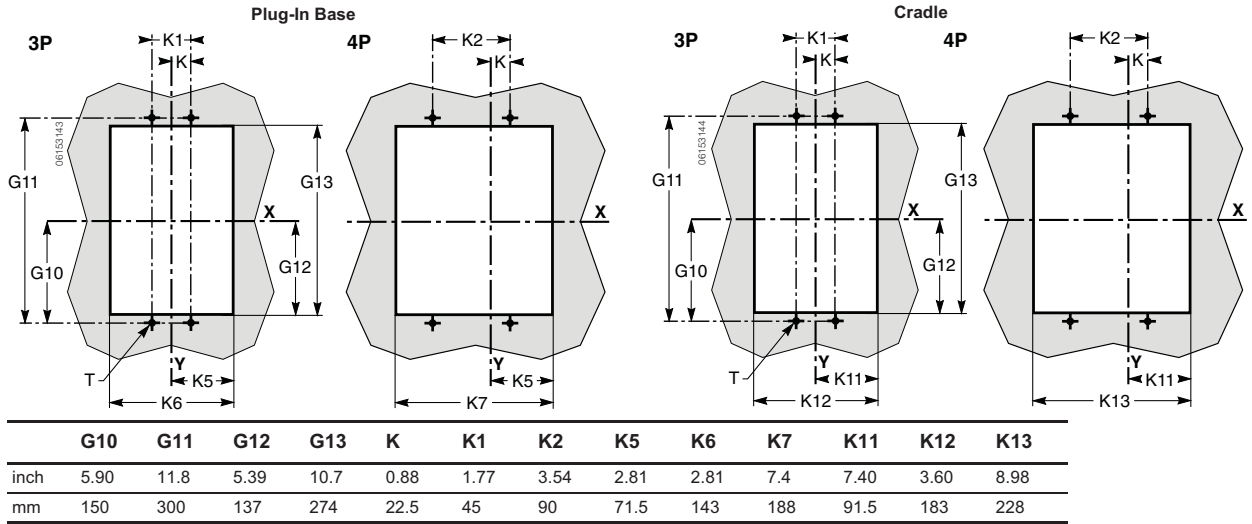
PowerPact L-Frame Circuit Breaker Mounting on Rails (Plug-In Base or Cradle)
